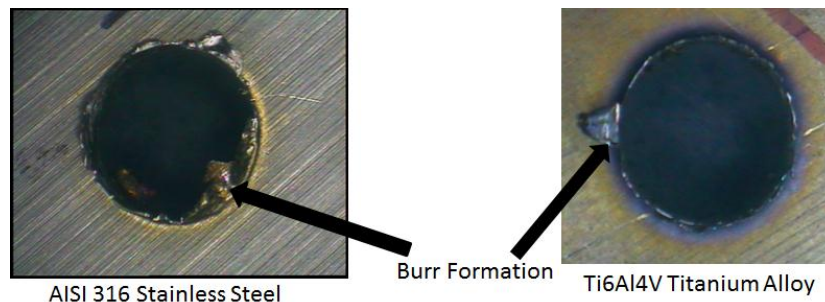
Burr formation after drilling of AISI 316 and Ti6Al4V work pieces
